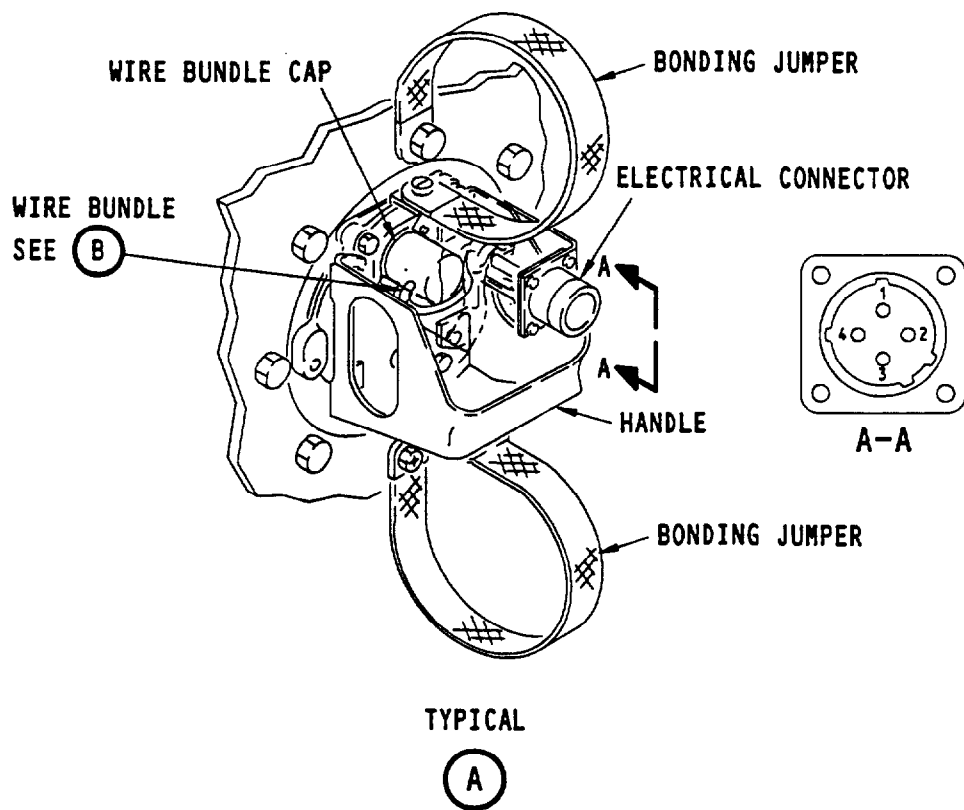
AIRPLANE FUEL PUMP INSPECTION
